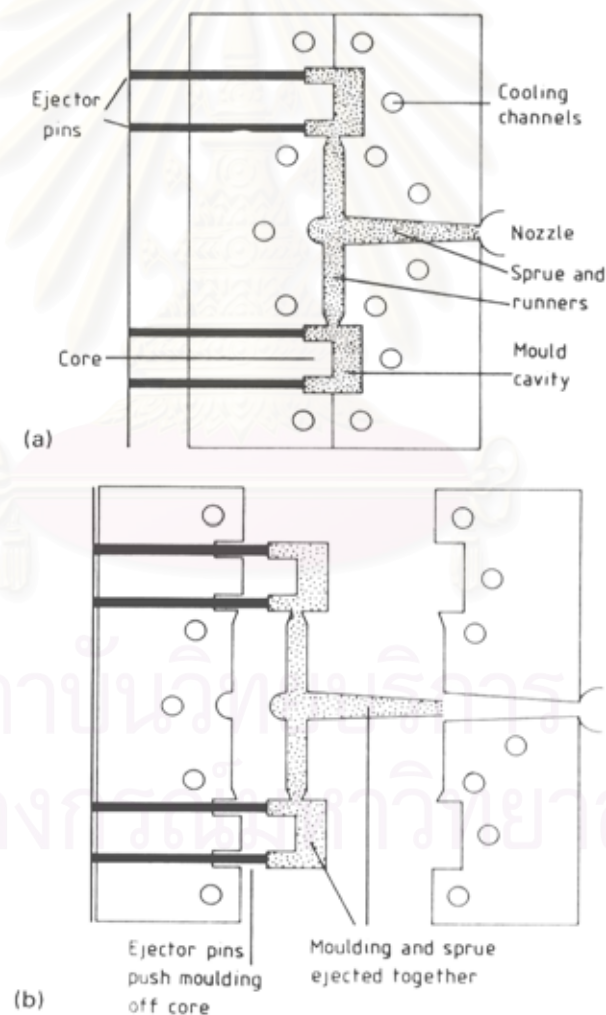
Two-plate mold; (a) closed mold; (b) opened mold
